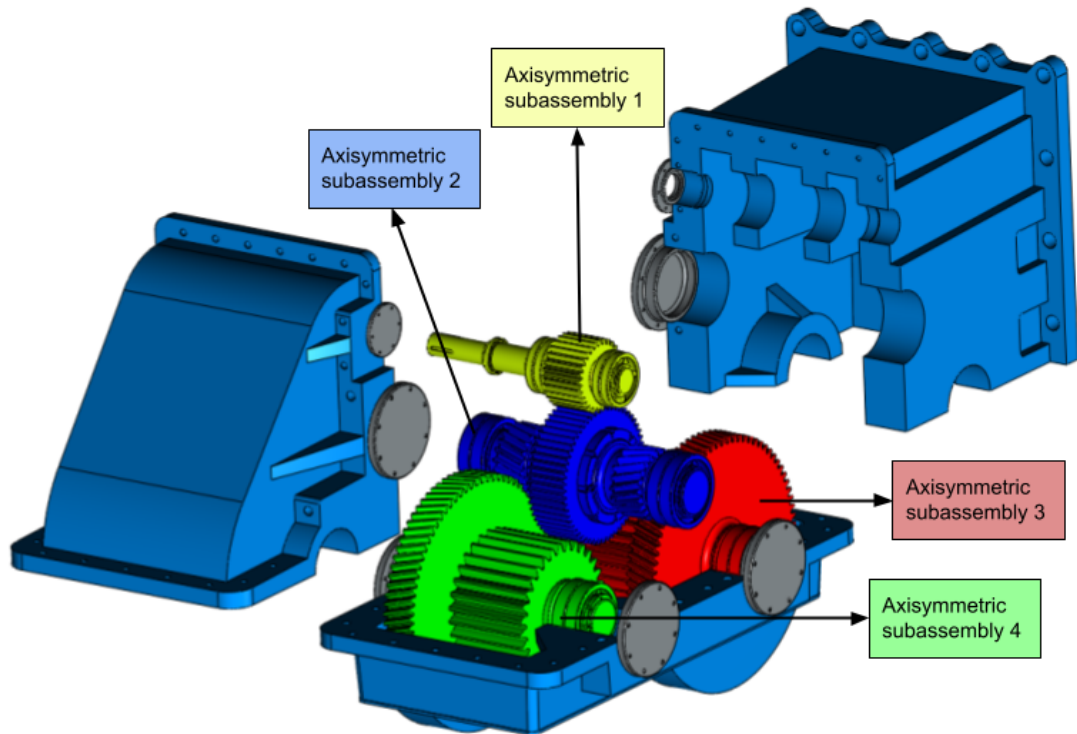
Exploded view of the CAD model of a gearbox, with highlighting of its axisymmetric subassemblies.
